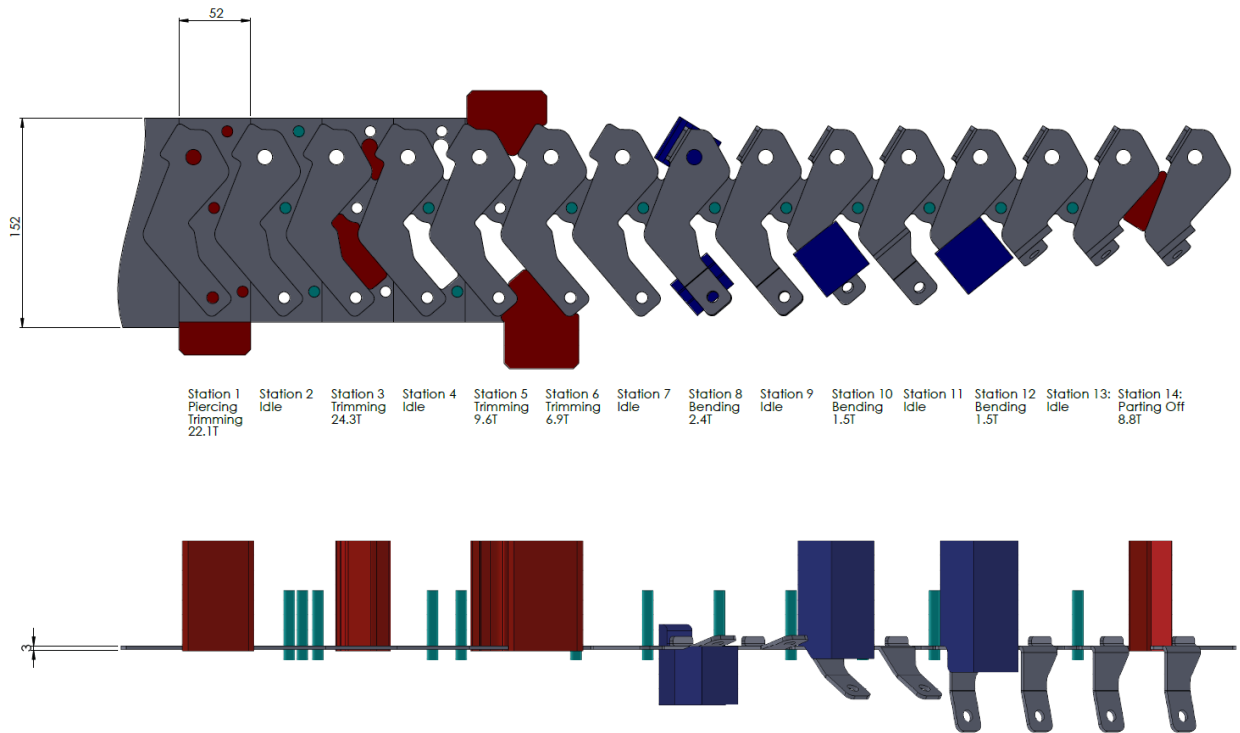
Modernized strip layout, top and front views. Blue – forming and bending punches, teal – pilots, red – trimming and piercing punches
